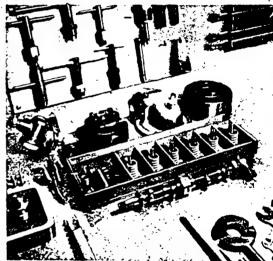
Pull out pump plunger lower spring plate and Fig 22 Board for depositing components plunger spring.
